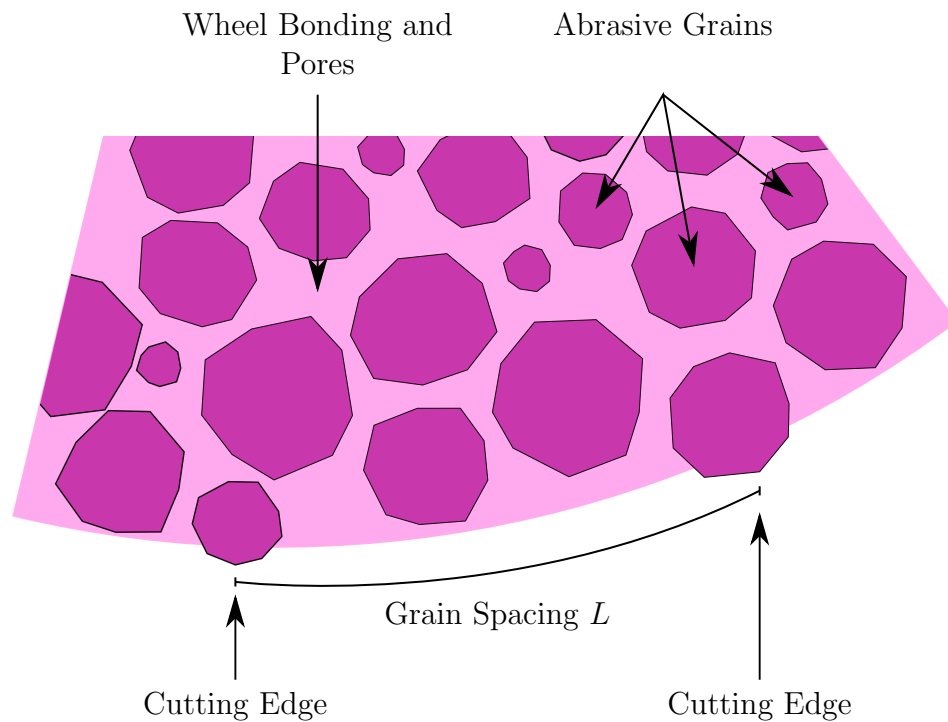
A section of a grinding wheel that showing the grain spacing between cutting points.
